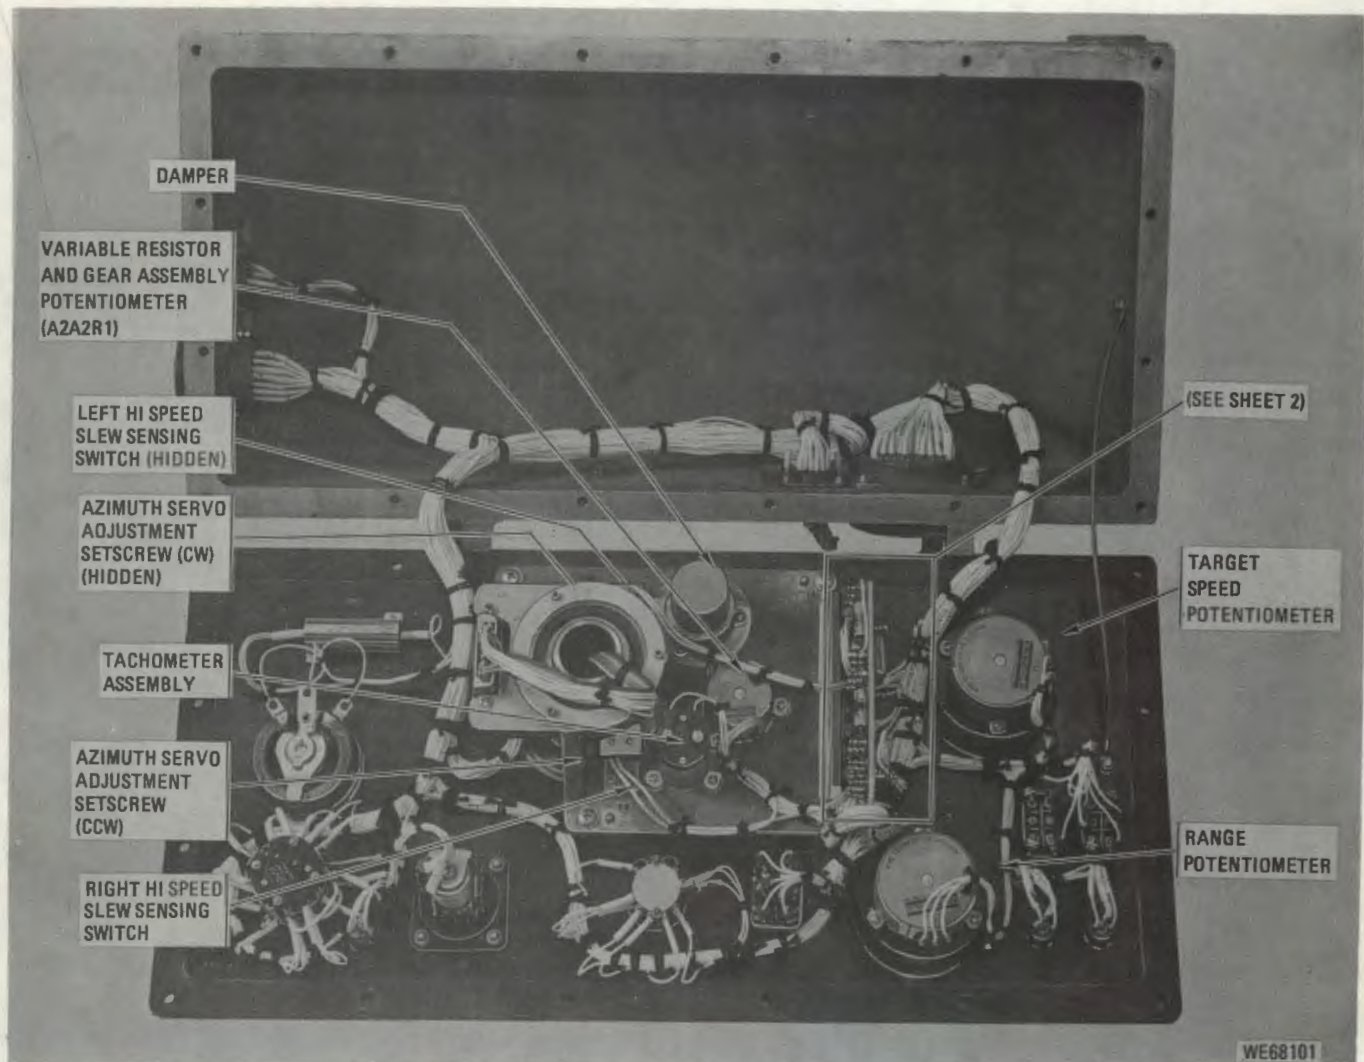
Control panel assembly, parts location - sheet 1 of 2.
